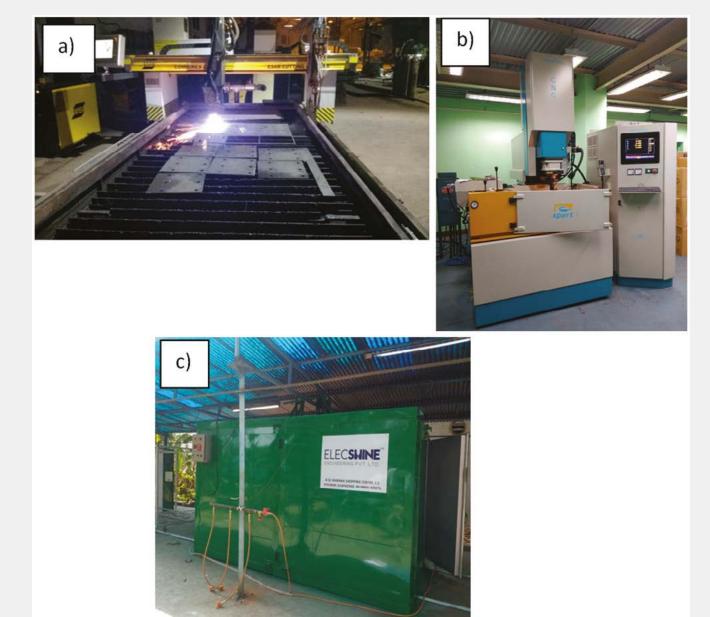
a) CNC Plasma Arc Cutting machine, b) CNC EDM and c) Powder coating facility
